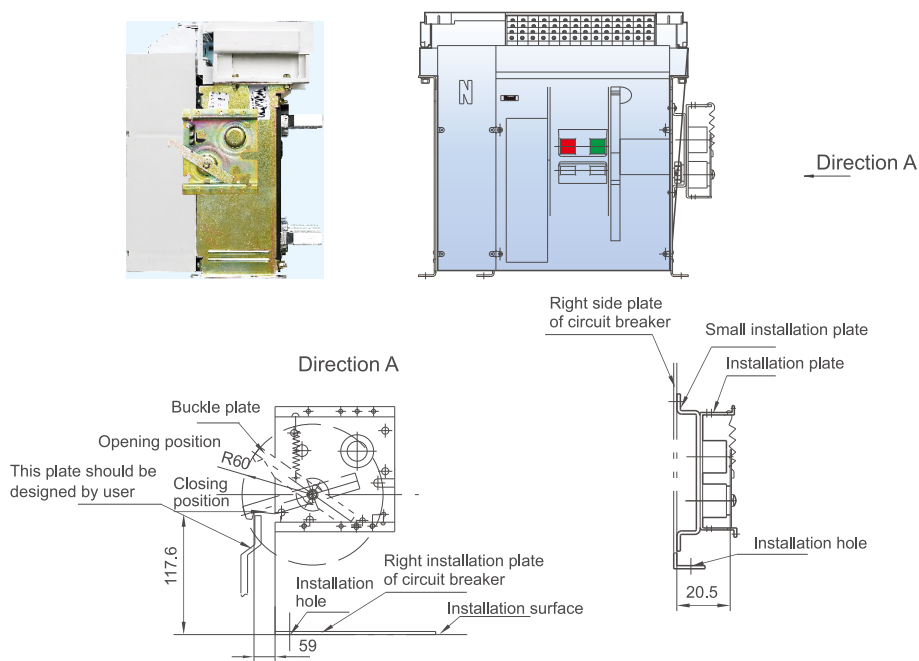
NA8-1600 fixed type circuit breaker status door interlock installation dimensions
